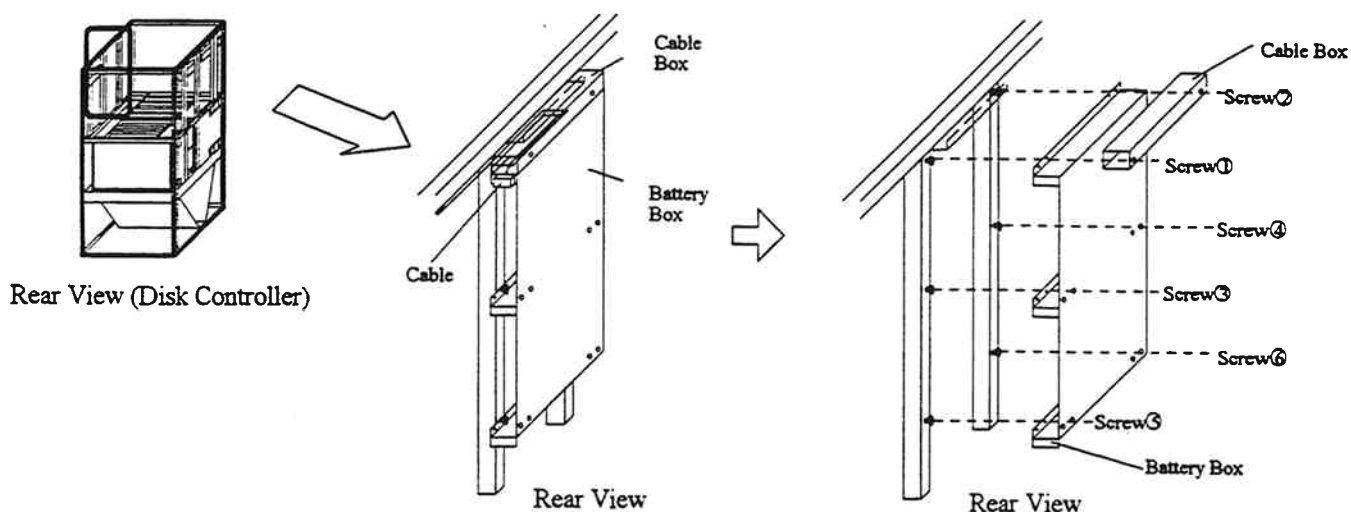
Removal of the Battery Box.
